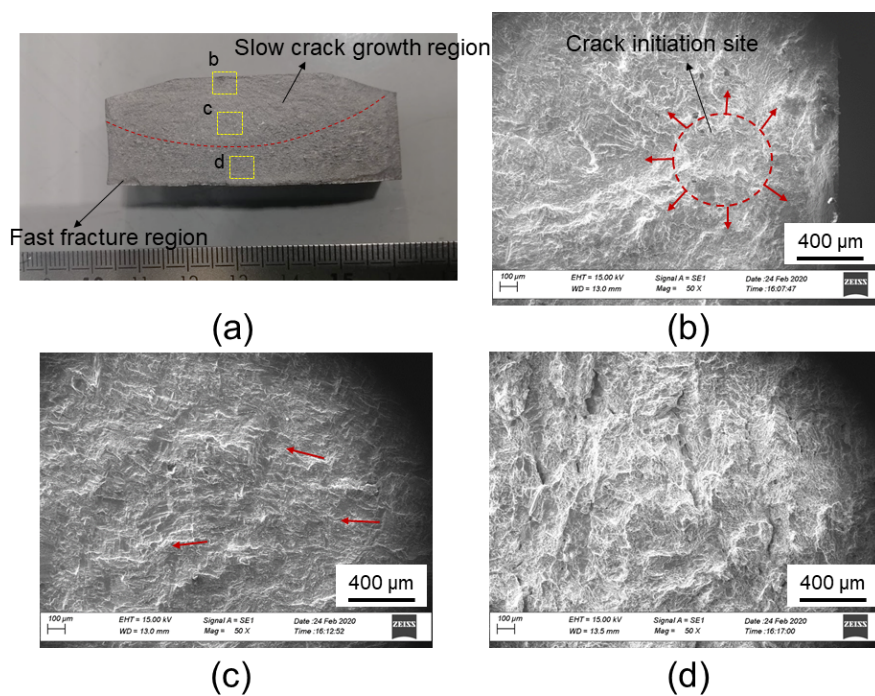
Fractured surface analysis of laser peened Ti6Al4V alloy; (a) fractured surface; (b) crack initiation site; (c) slow crack growth region; and (d) fast fracture region.
